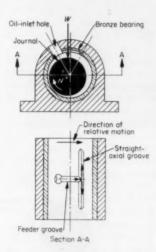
Oil-inlet hole joined to properly located straightaxial groove by a feeder groove. To aid machining, feeder groove may extend slightly beyond the straight groove or inlet hole.
